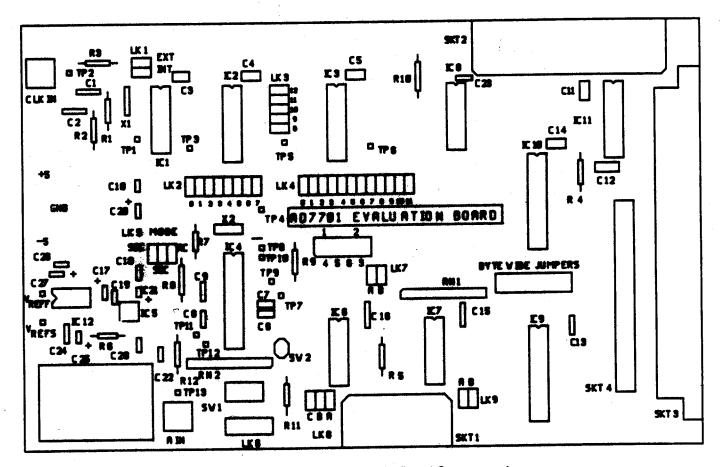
AD7701/AD7703 Evaluation Board Component Layout
